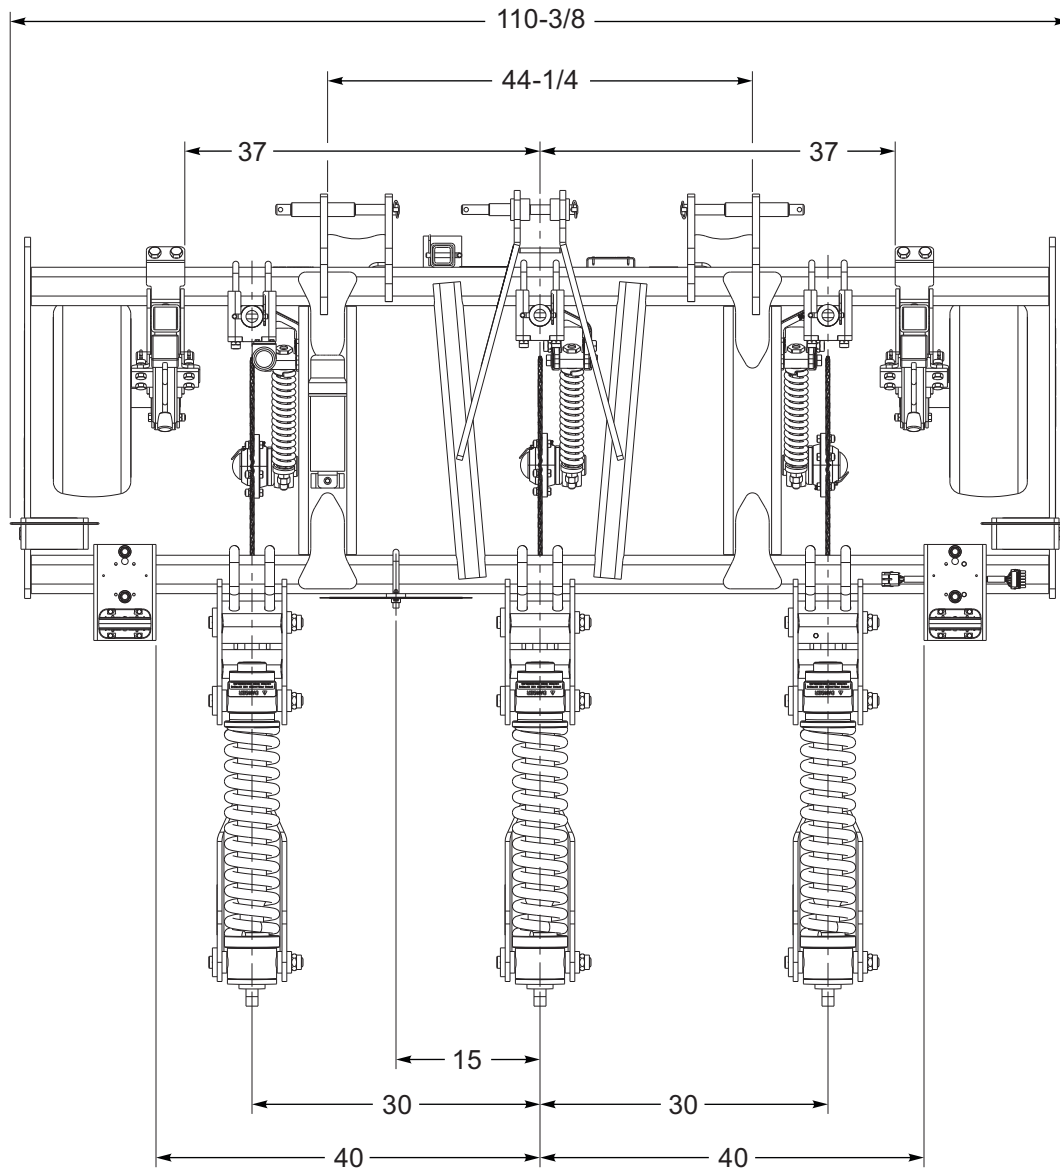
2511N-3-30 Shank and Lighting Placement
